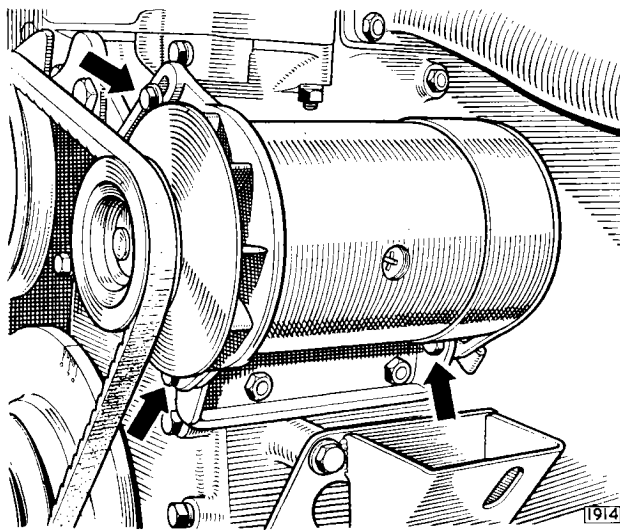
To adjust the belt tension slacken the three dynamo mounting bolts and move the dynamo into the desired position. Adjustment is not necessary on cars fitted with a jockey pulley.
